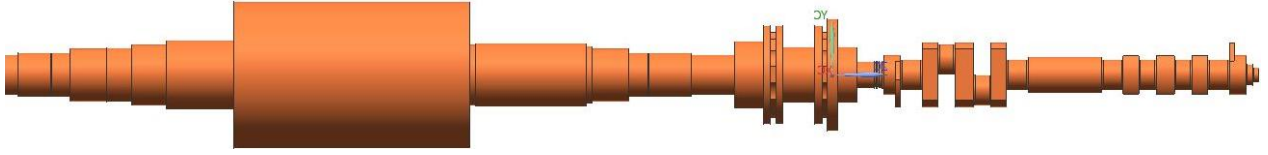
DTY500 compressor crankshaft system three-dimensional model
